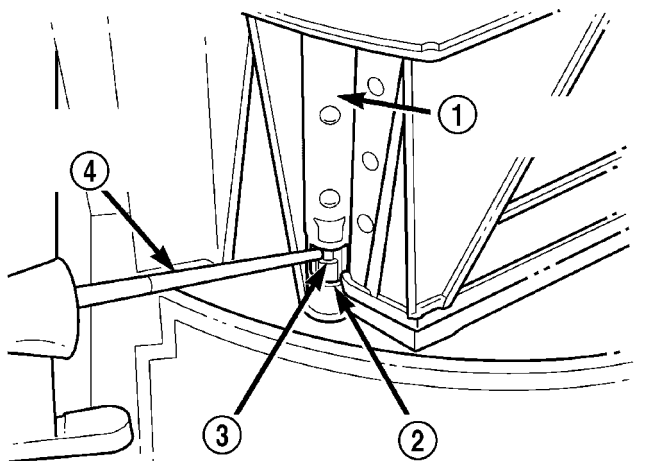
PANEL DOOR REMOVE/INSTALL 80abfef2
